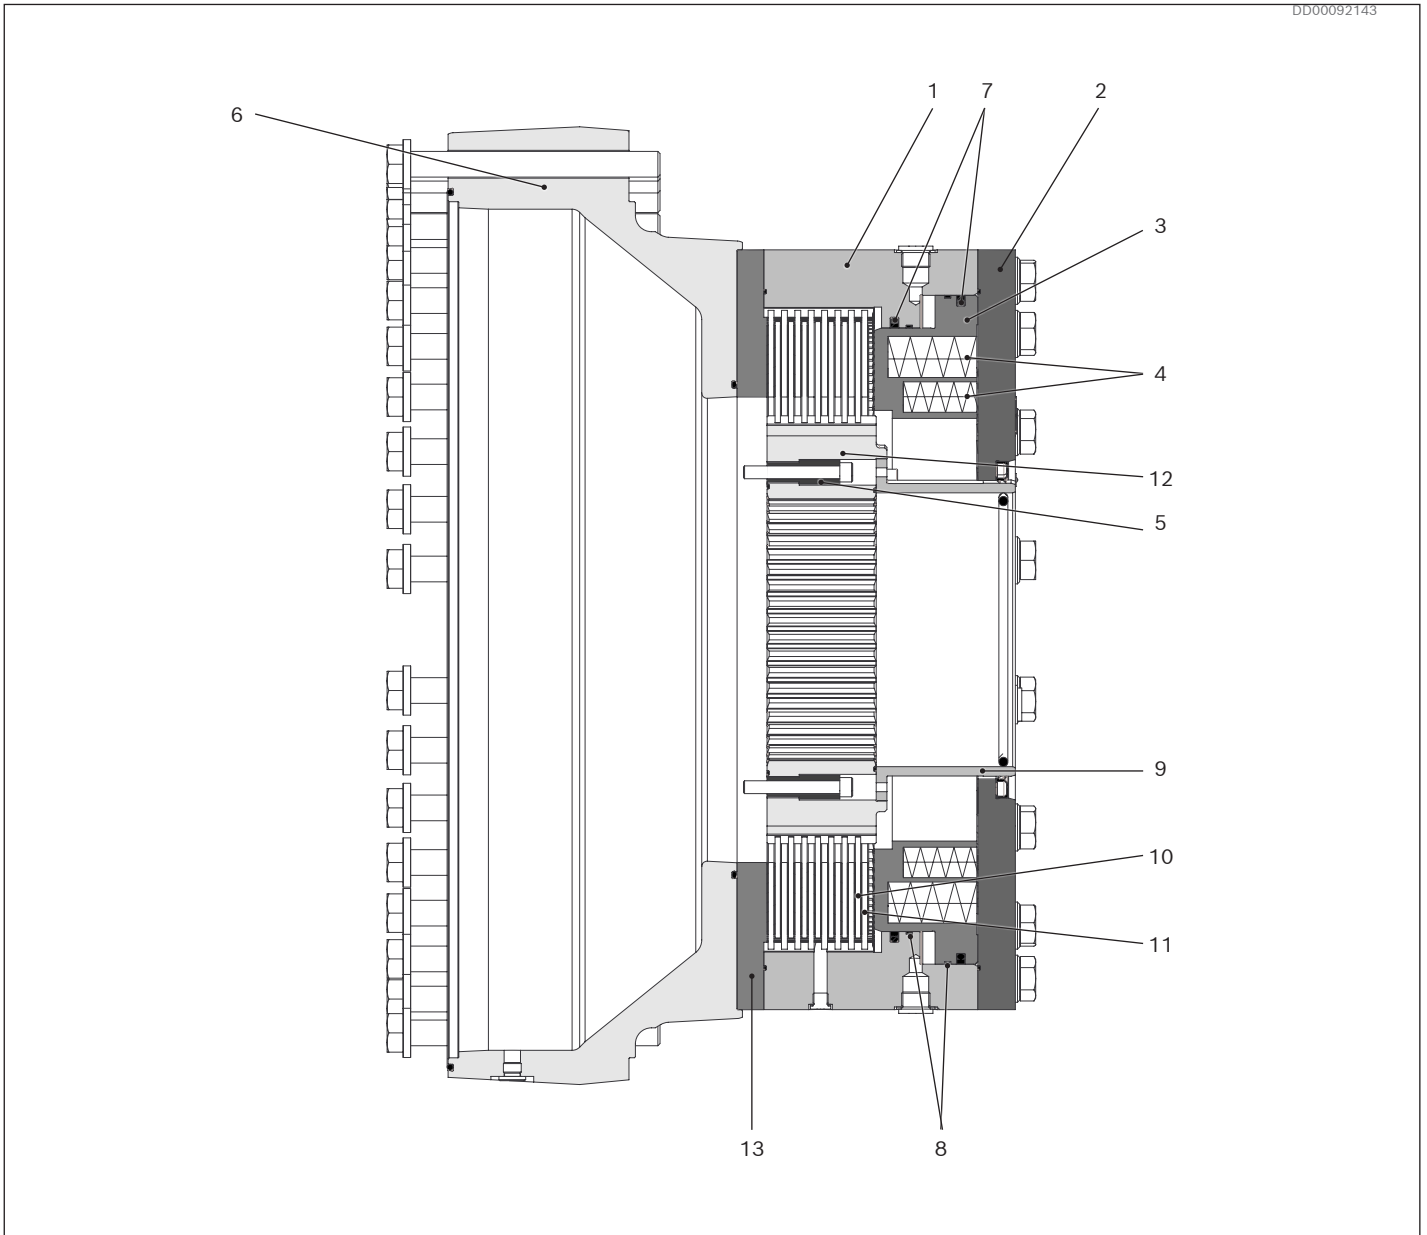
Section view of Hägglunds BICA 48 to BICA 160 for CB motors
